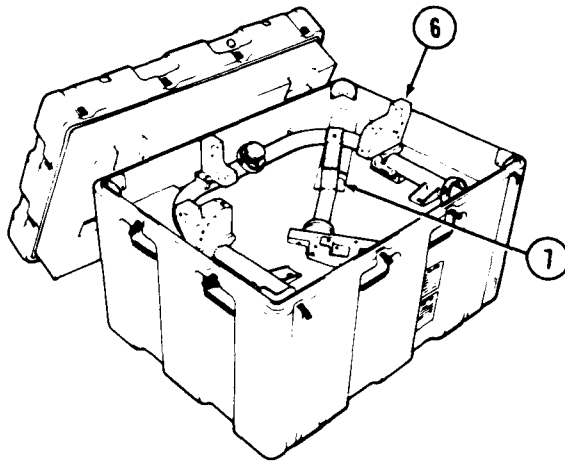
Boresight Assembly, Ground Support Equipment (BAGSE)
